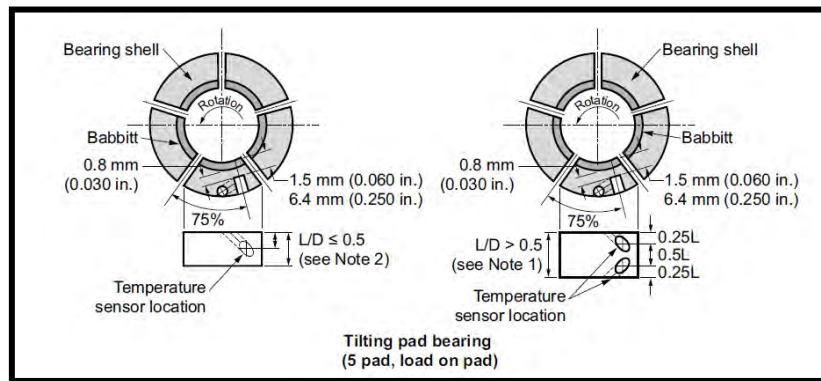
Bearing Temperature Sensor Location for Load on Pad Design (Courtesy of API-670)
